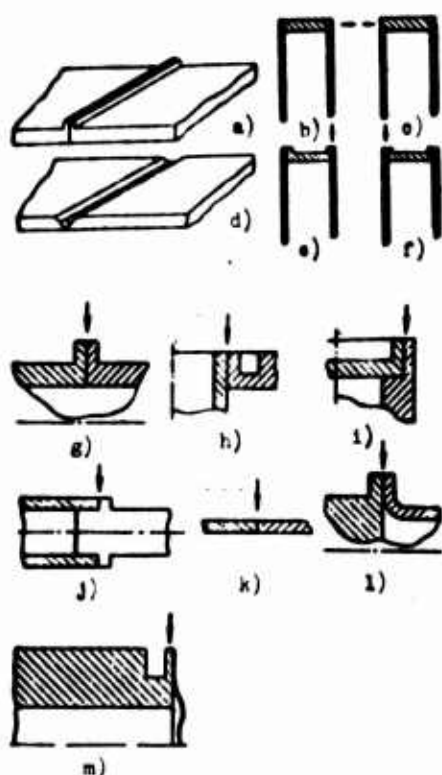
Types of welded joints recommended in electron-beam welding. Pointer shows direction of electron beam on edges.
